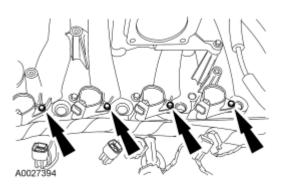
Ignition Coils & Bolts Courtesy of FORD MOTOR CO.
